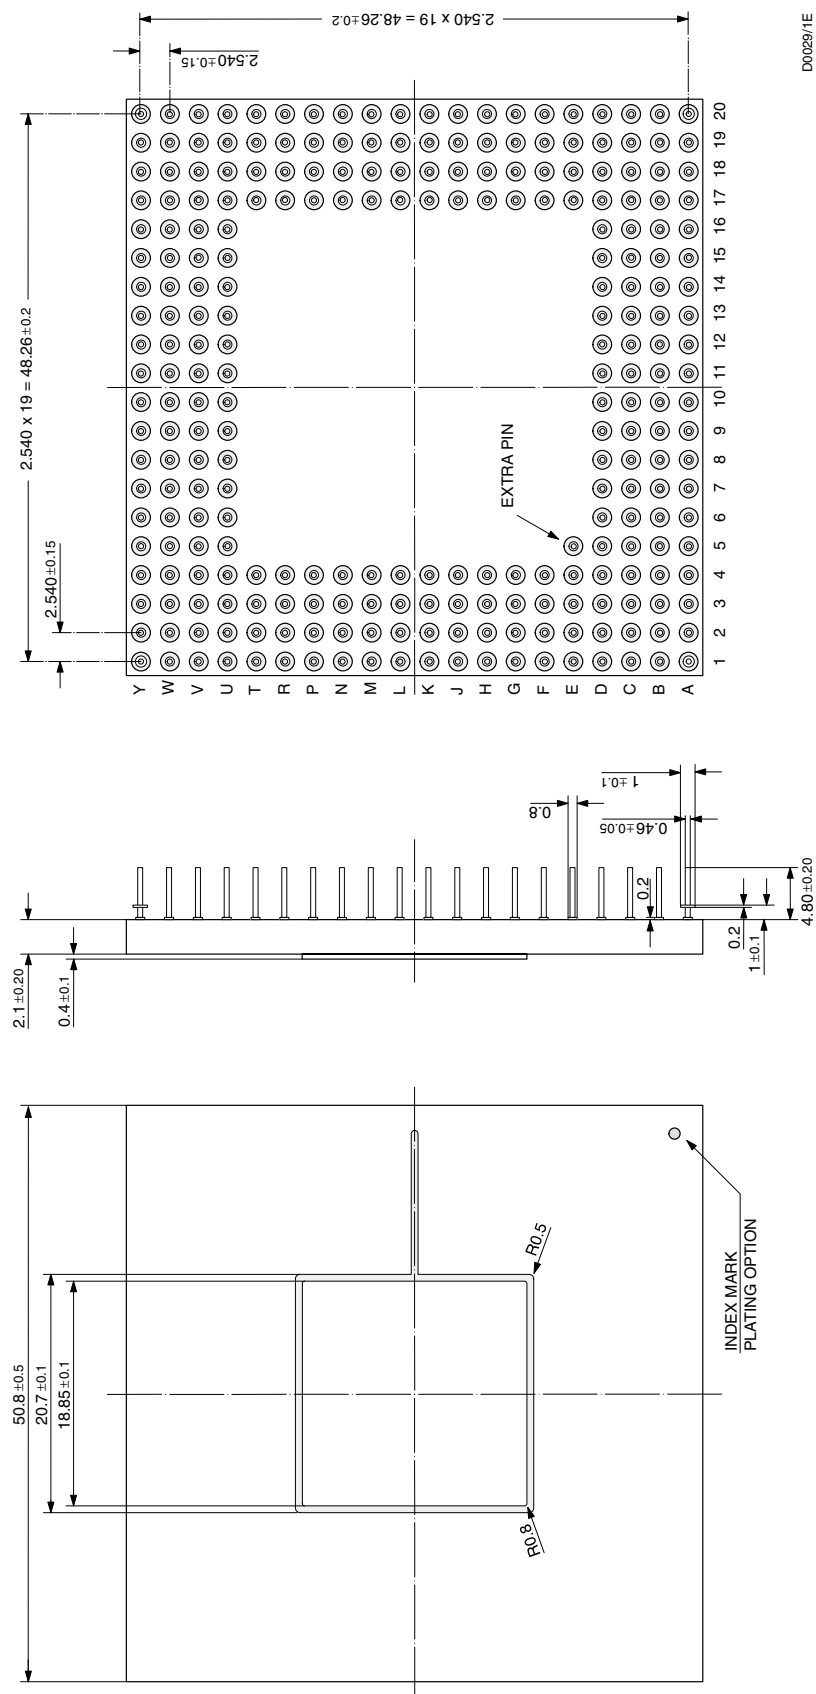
CPGA257 Ceramic Pin Grid Array 257-Pin (Weight approx. 32g. Dimensions in mm)
